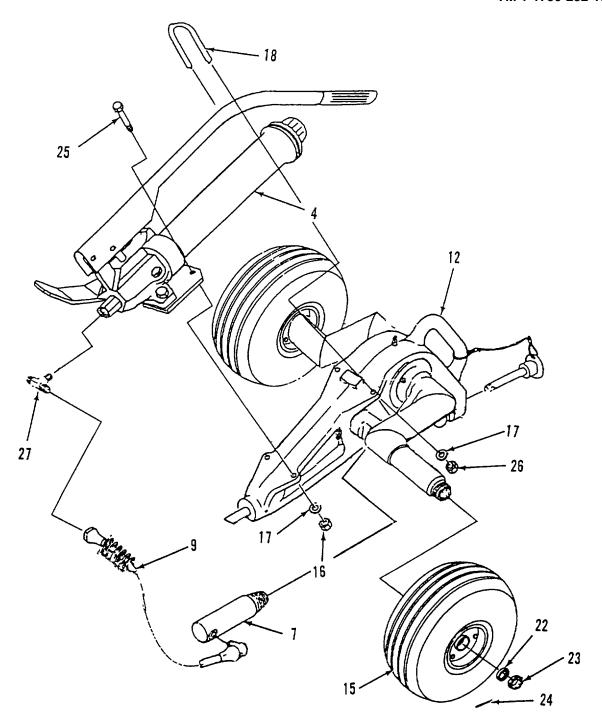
Ground Handling Wheels Assembly, P/N 1730-EG-100
